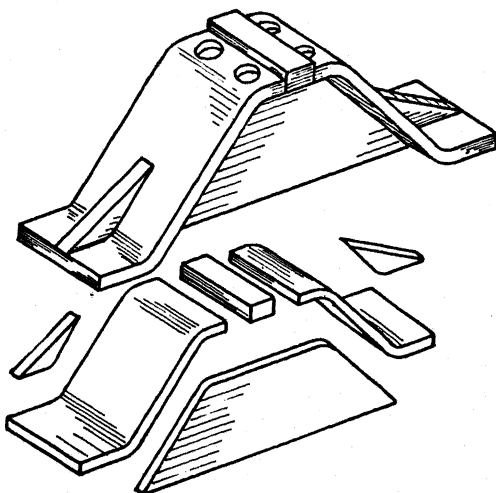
This support includes an insert in the top surface which can be especially machined. This assembly provides an exceptionally strong, rigid construction.
